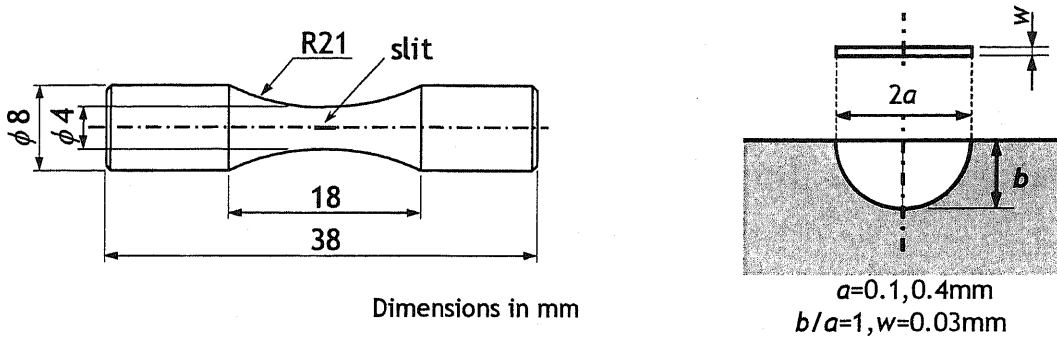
Shape and dimensions of specimen and crack-like slit.
